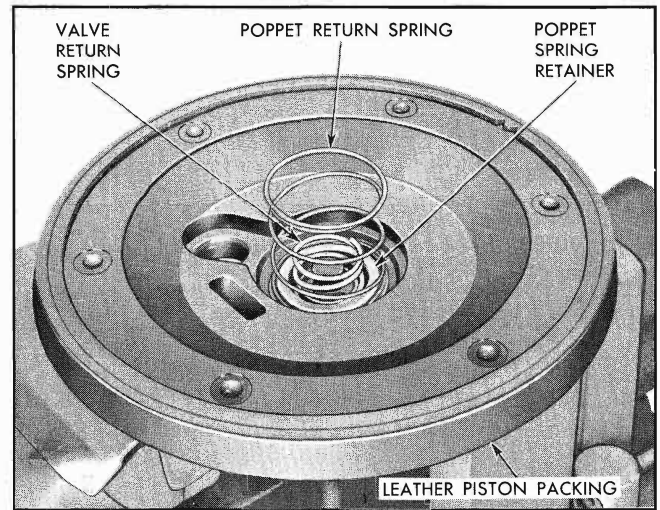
B-19 Parts Installed on Rear Piston Plate
